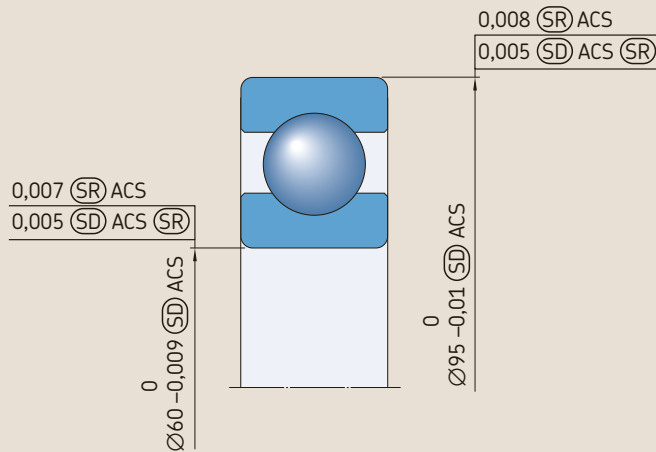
ISO GPS tolerance indications for rolling bearing diameters.
